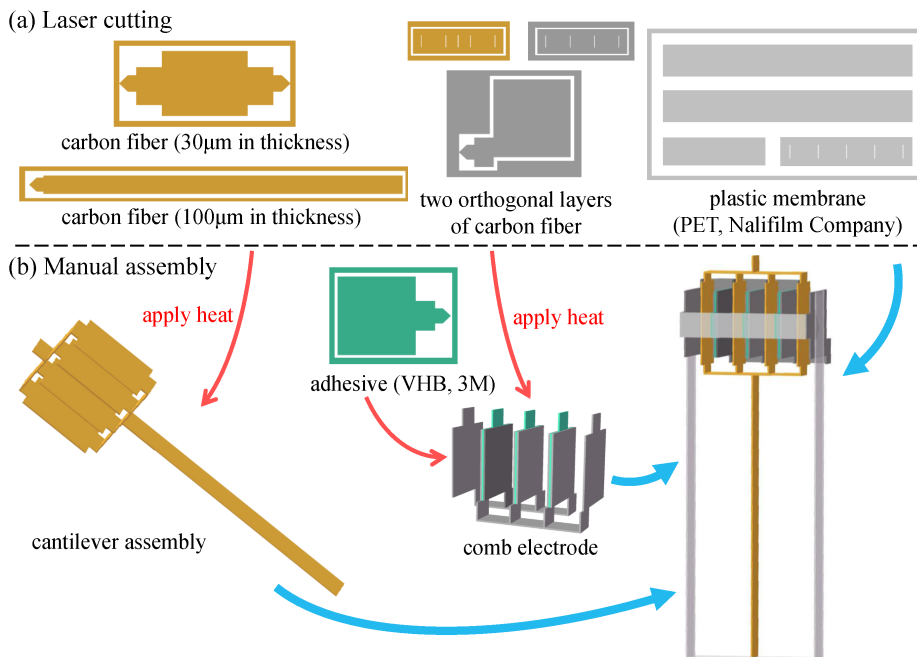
Fabrication and assembly process of the electrostatic comb actuator. The prototype comb actuator has a total mass of 60 mg by using lightweight materials.
